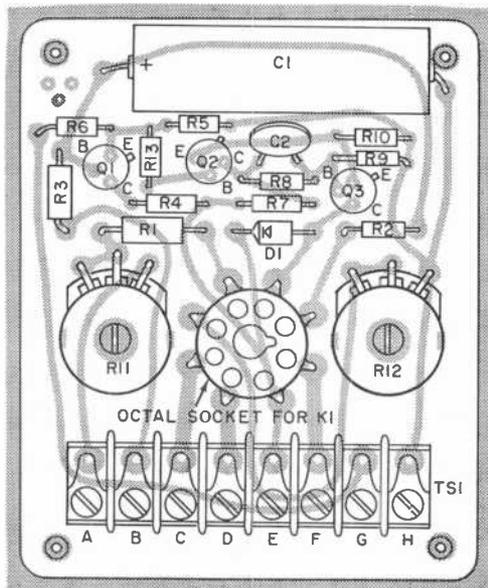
If you make or buy a printed circuit board the components should be positioned as shown. The 3 spare holes in the corner mount a socket to hold Q1 when this transistor is not in the circuit.
